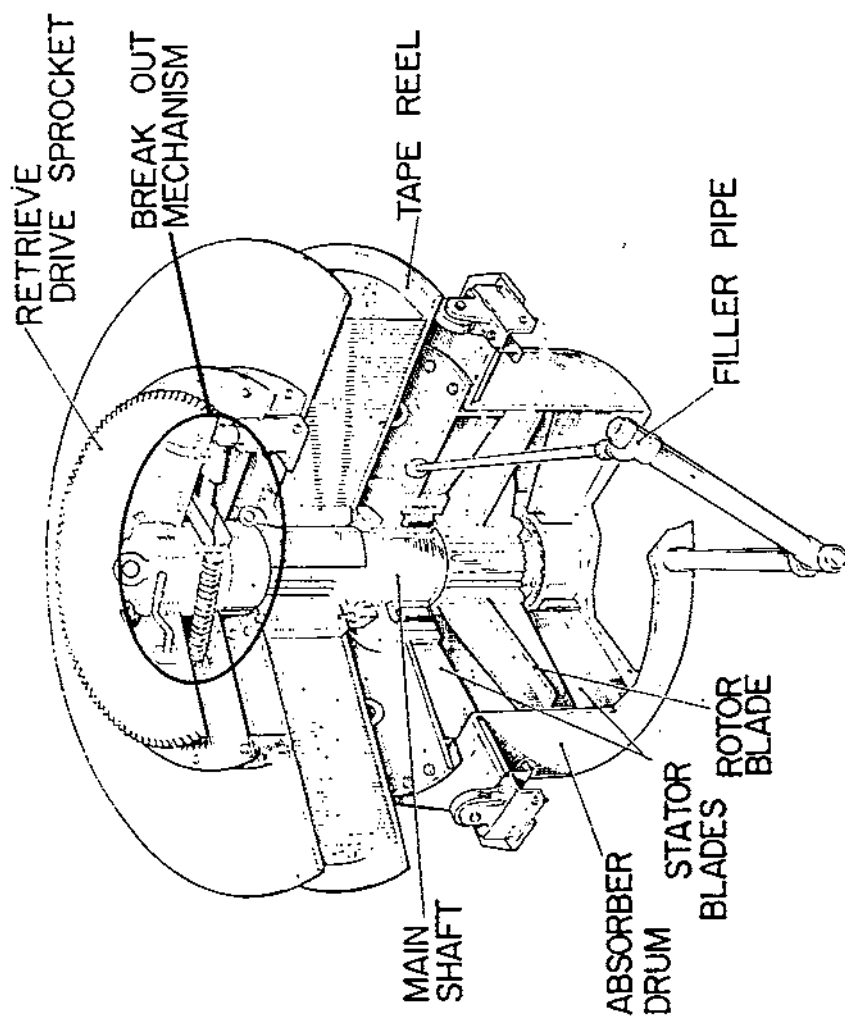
The Energy Absorber Unit drum with the tape reel and the retrieve drive sprocket mounted above it.
